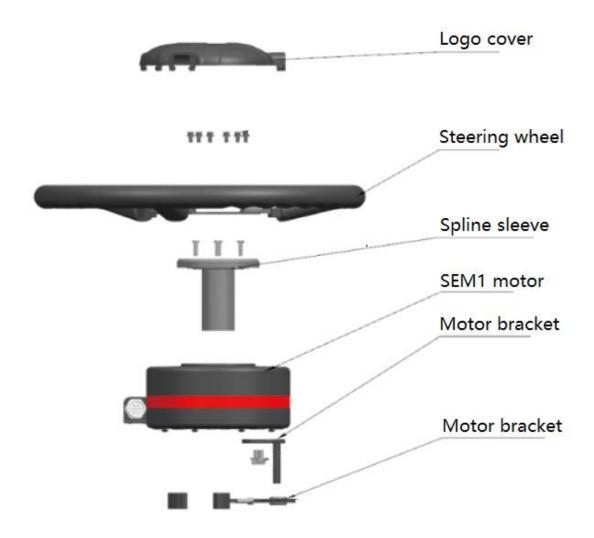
Assembly diagram of SEM1 motor wheel
